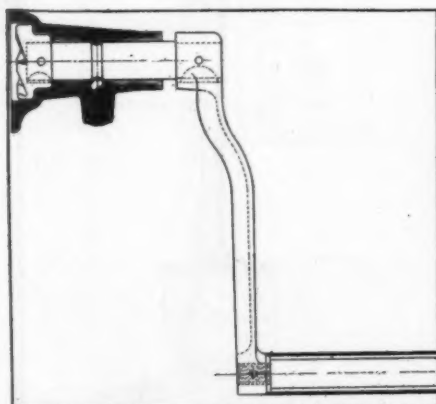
Section of the extension of the front of the crankcase, showing the design of the starting crank and how the dog is fastened to the short shaft.
